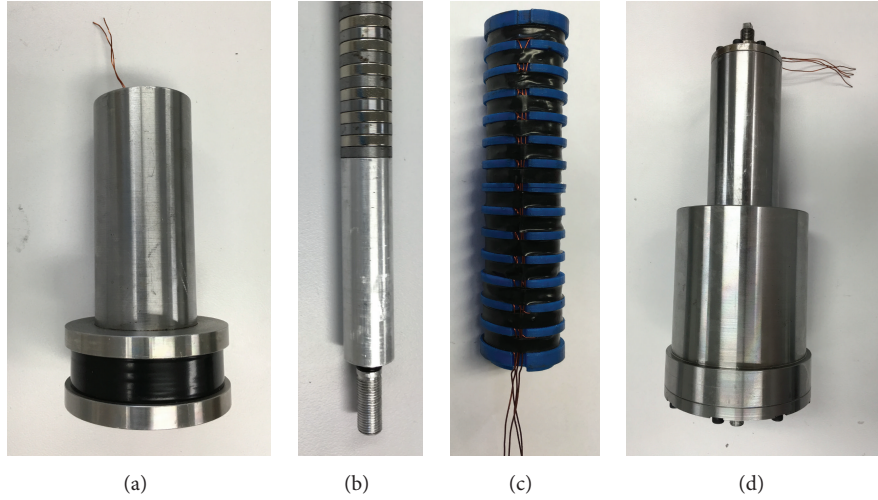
The proposed MR damper: (a) piston head, (b) permanent magnets array and shaft, (c) winding base and inducing coils of generator, and (d) the assembly.
